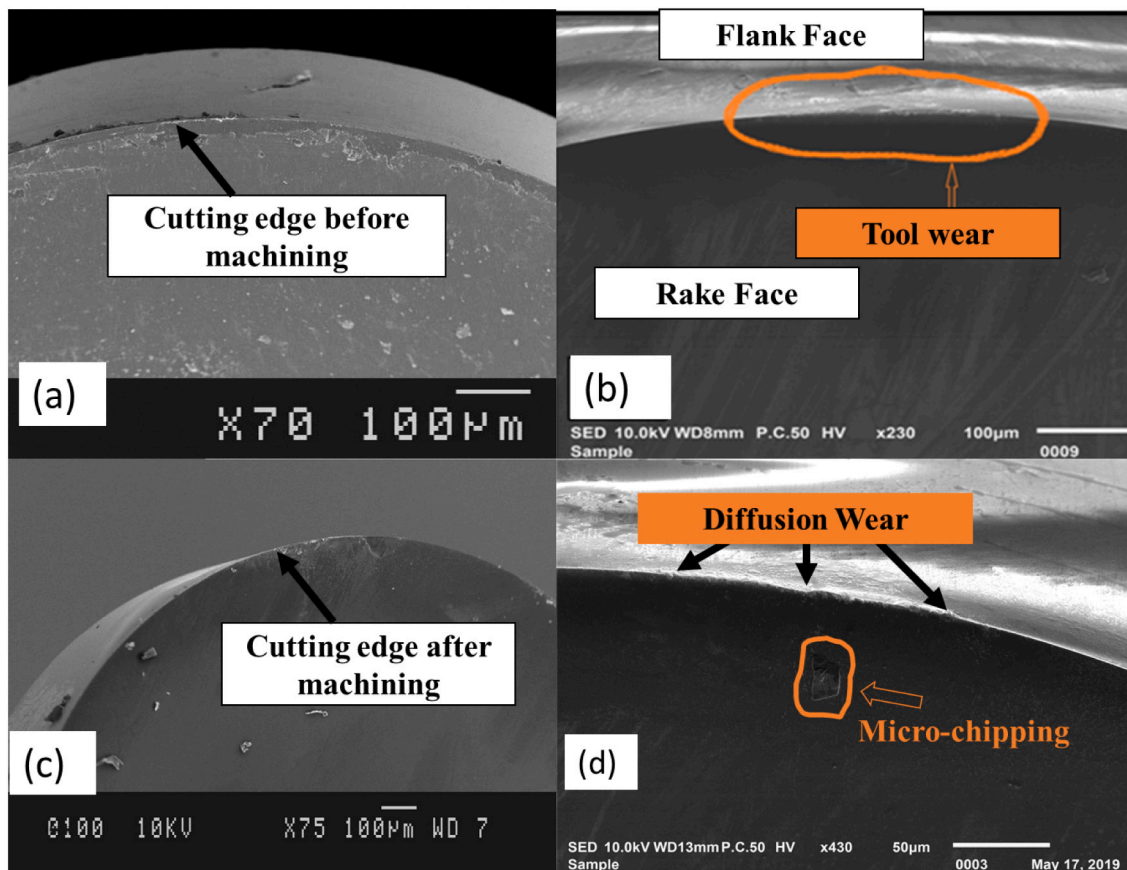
SEM examination the diamond tool with 1 mm tool nose radius (a) Pristine cutting edge before machining (c) Tool wear after a cut distance of 100 m. Zoomed view of the (b) Cutting edge (d) Diffusion wear and micro chipping of the tool.
